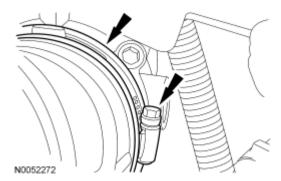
Identifying Safety Clip On A/C Suction Tube Fitting Courtesy of FORD MOTOR CO.
